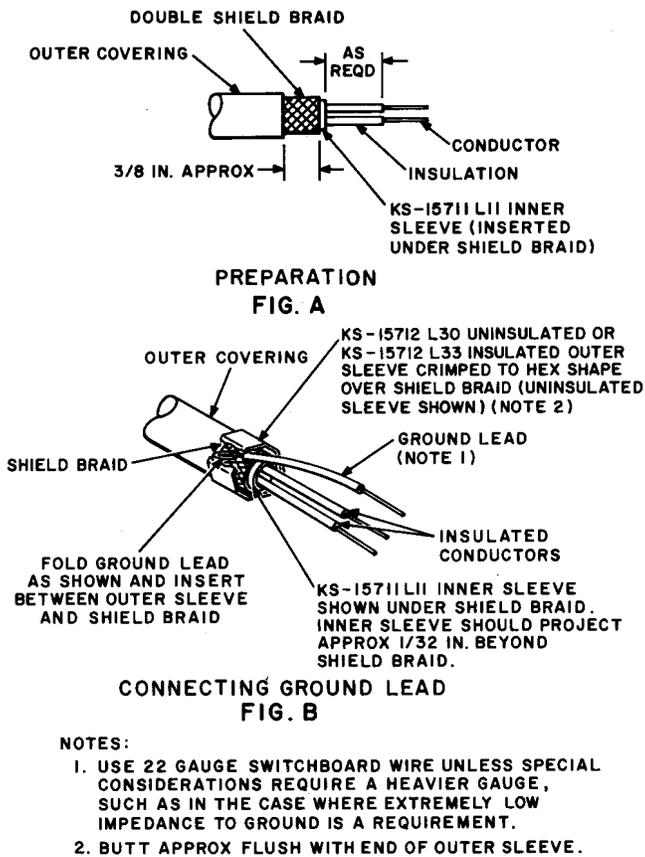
Connecting Ground to Shield of 761A-Type Shielded Cable
